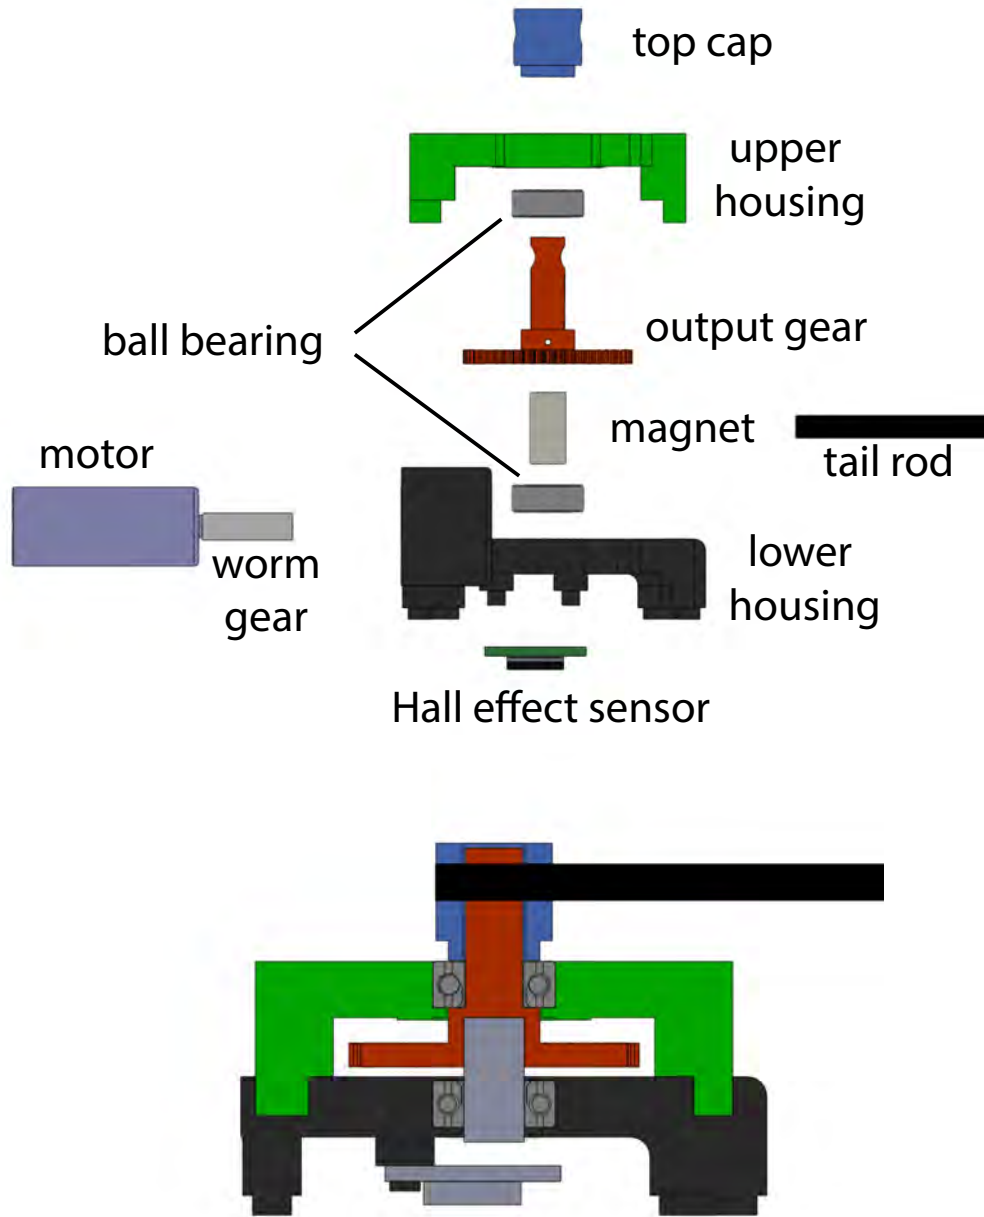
A section and exploded view of the unlimited rotation tail.
